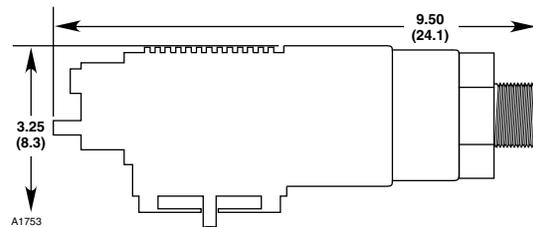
Stainless Steel PointWatch Unit Dimensions in Inches (cm)
